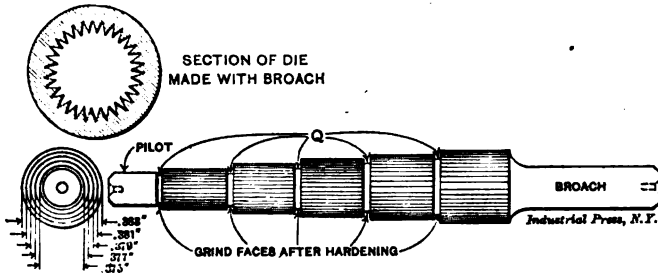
Broach for making Dies for Gear Blanks, etc.
